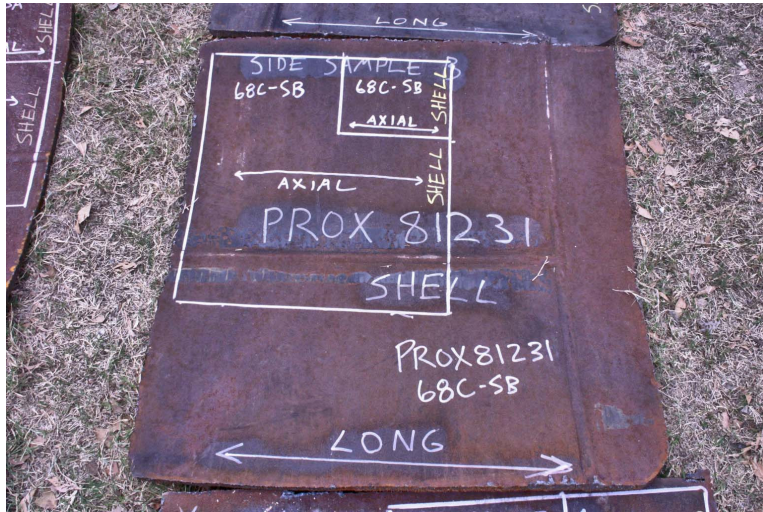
Collection of plates received, representative marking and torching smaller pieces out of the plate.
